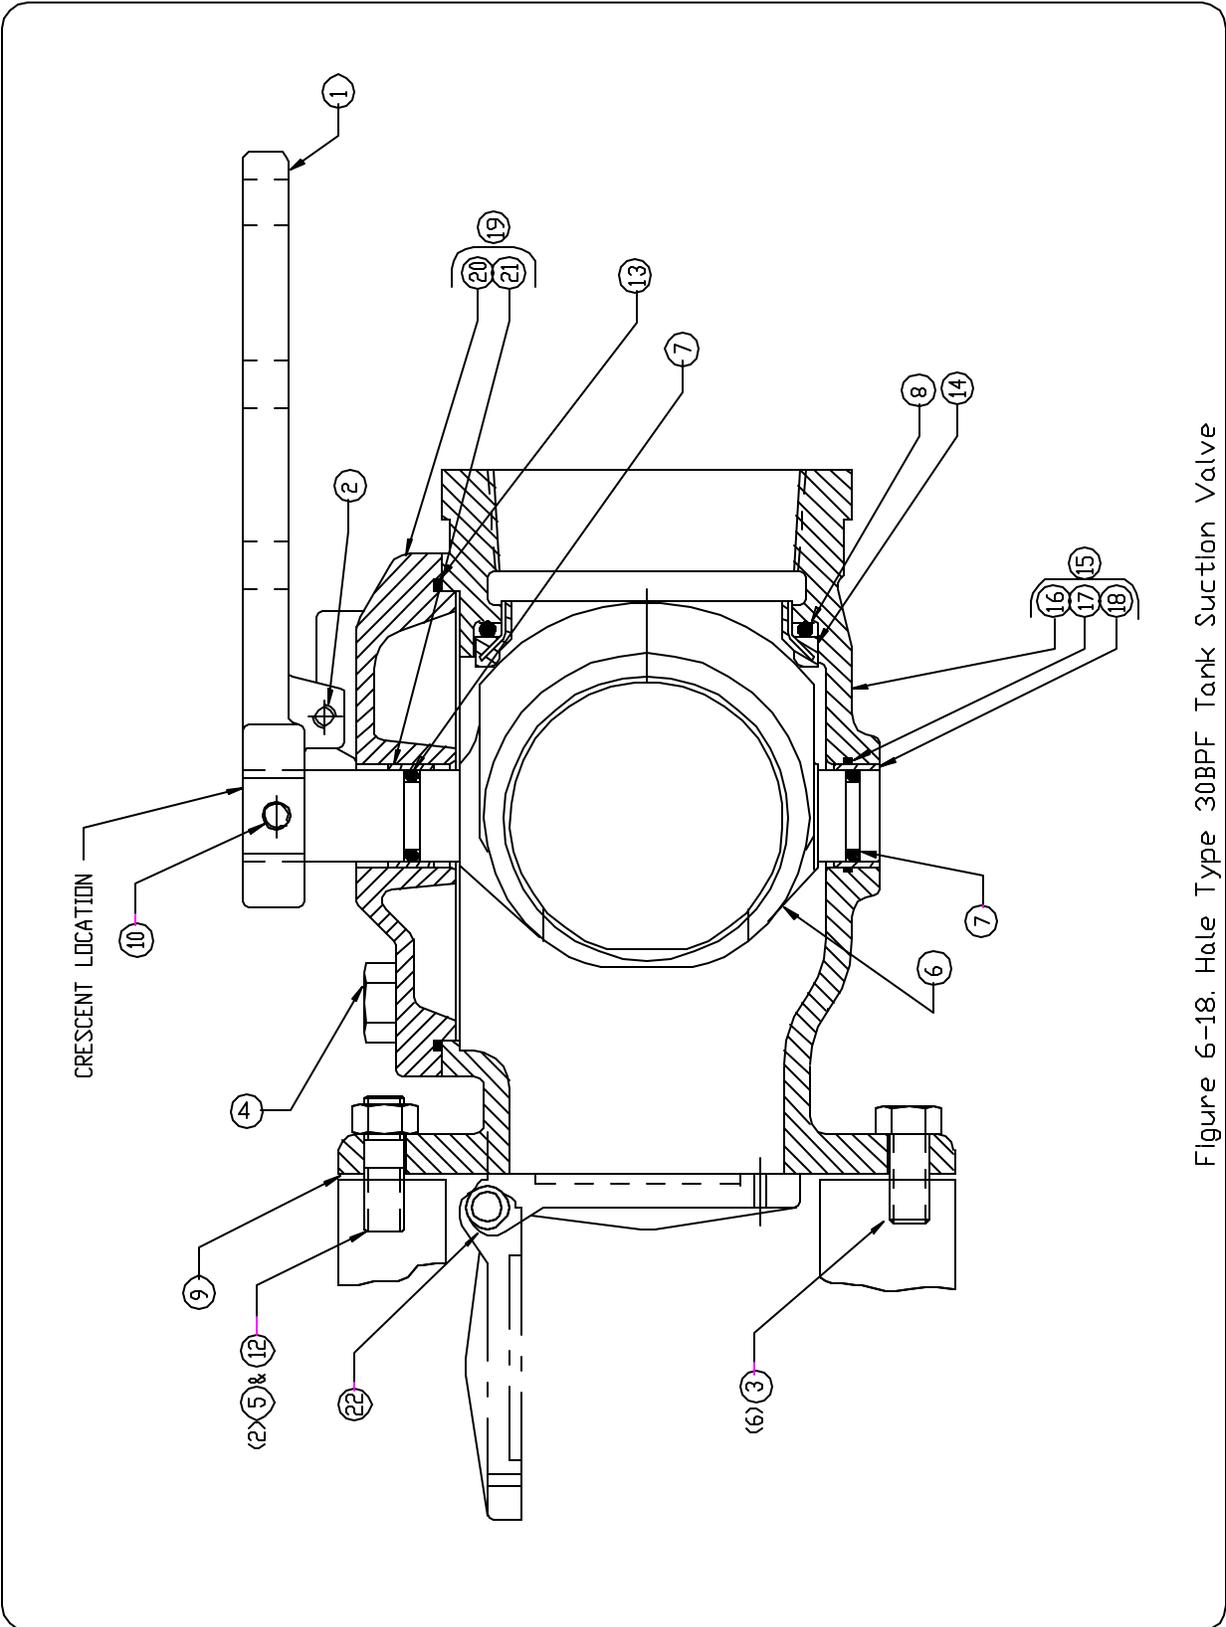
Hale Type 30BPF Tank Suction Valve
